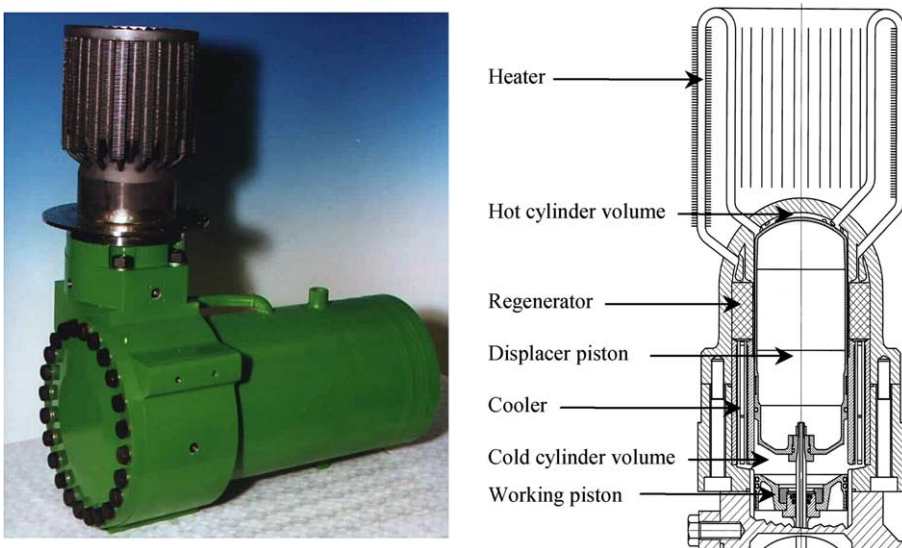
The SM5 Stirling engine with exposed heater (left) and a drawing of the cylinder region of the engine.
